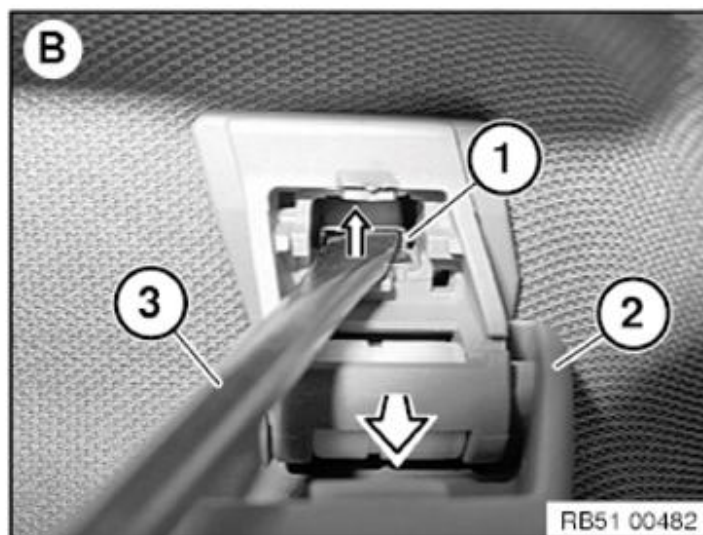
Disengaging Locking Wedge With Angle Screwdriver
